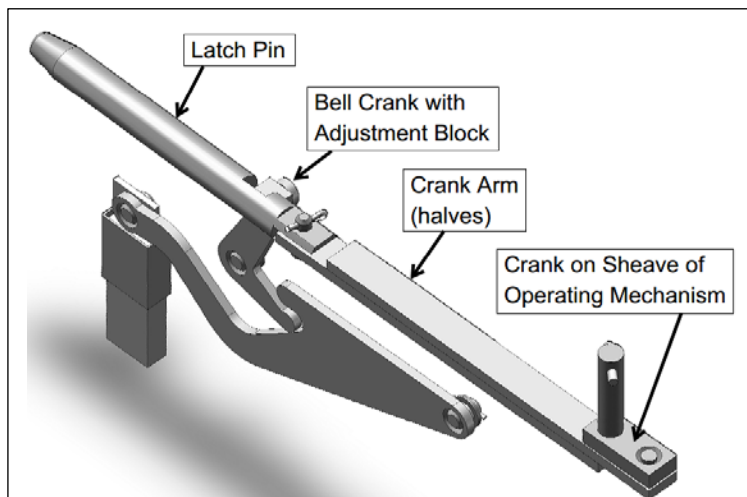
details of Crane Interlock Latch Pin, Hook Latch and Adjustment Block.
